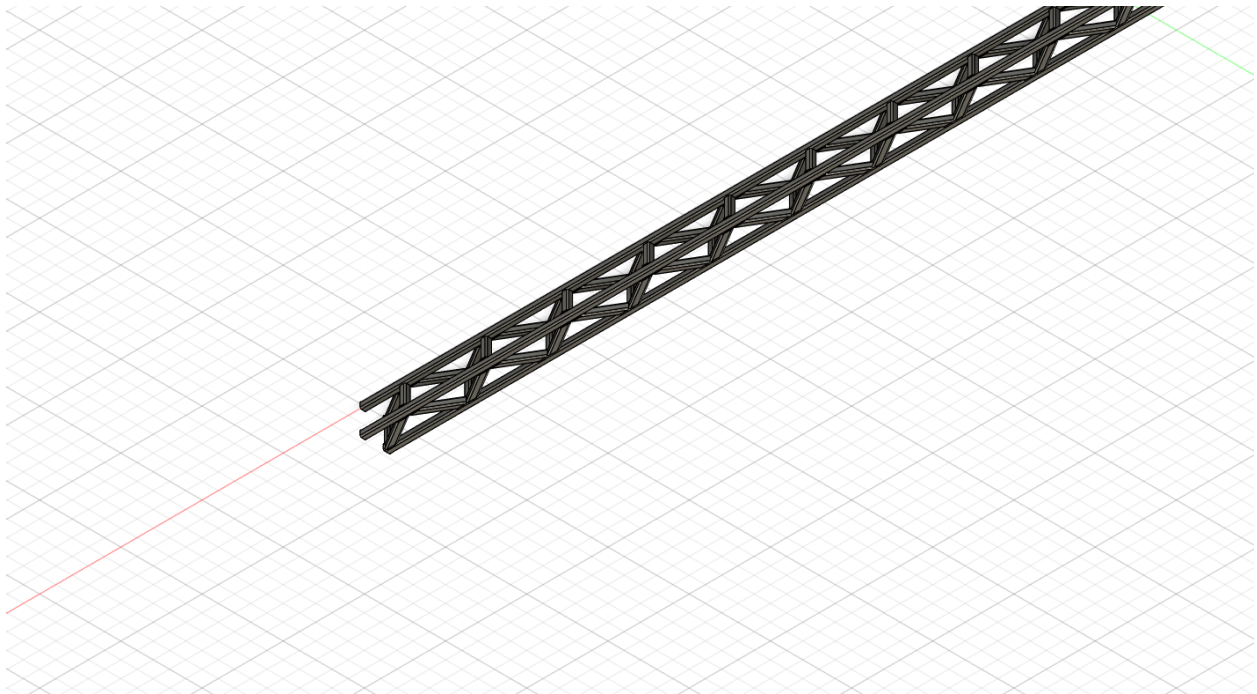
Modified 305 mm Spar with honeycomb structure (The traditional one was I-beam with supports)
